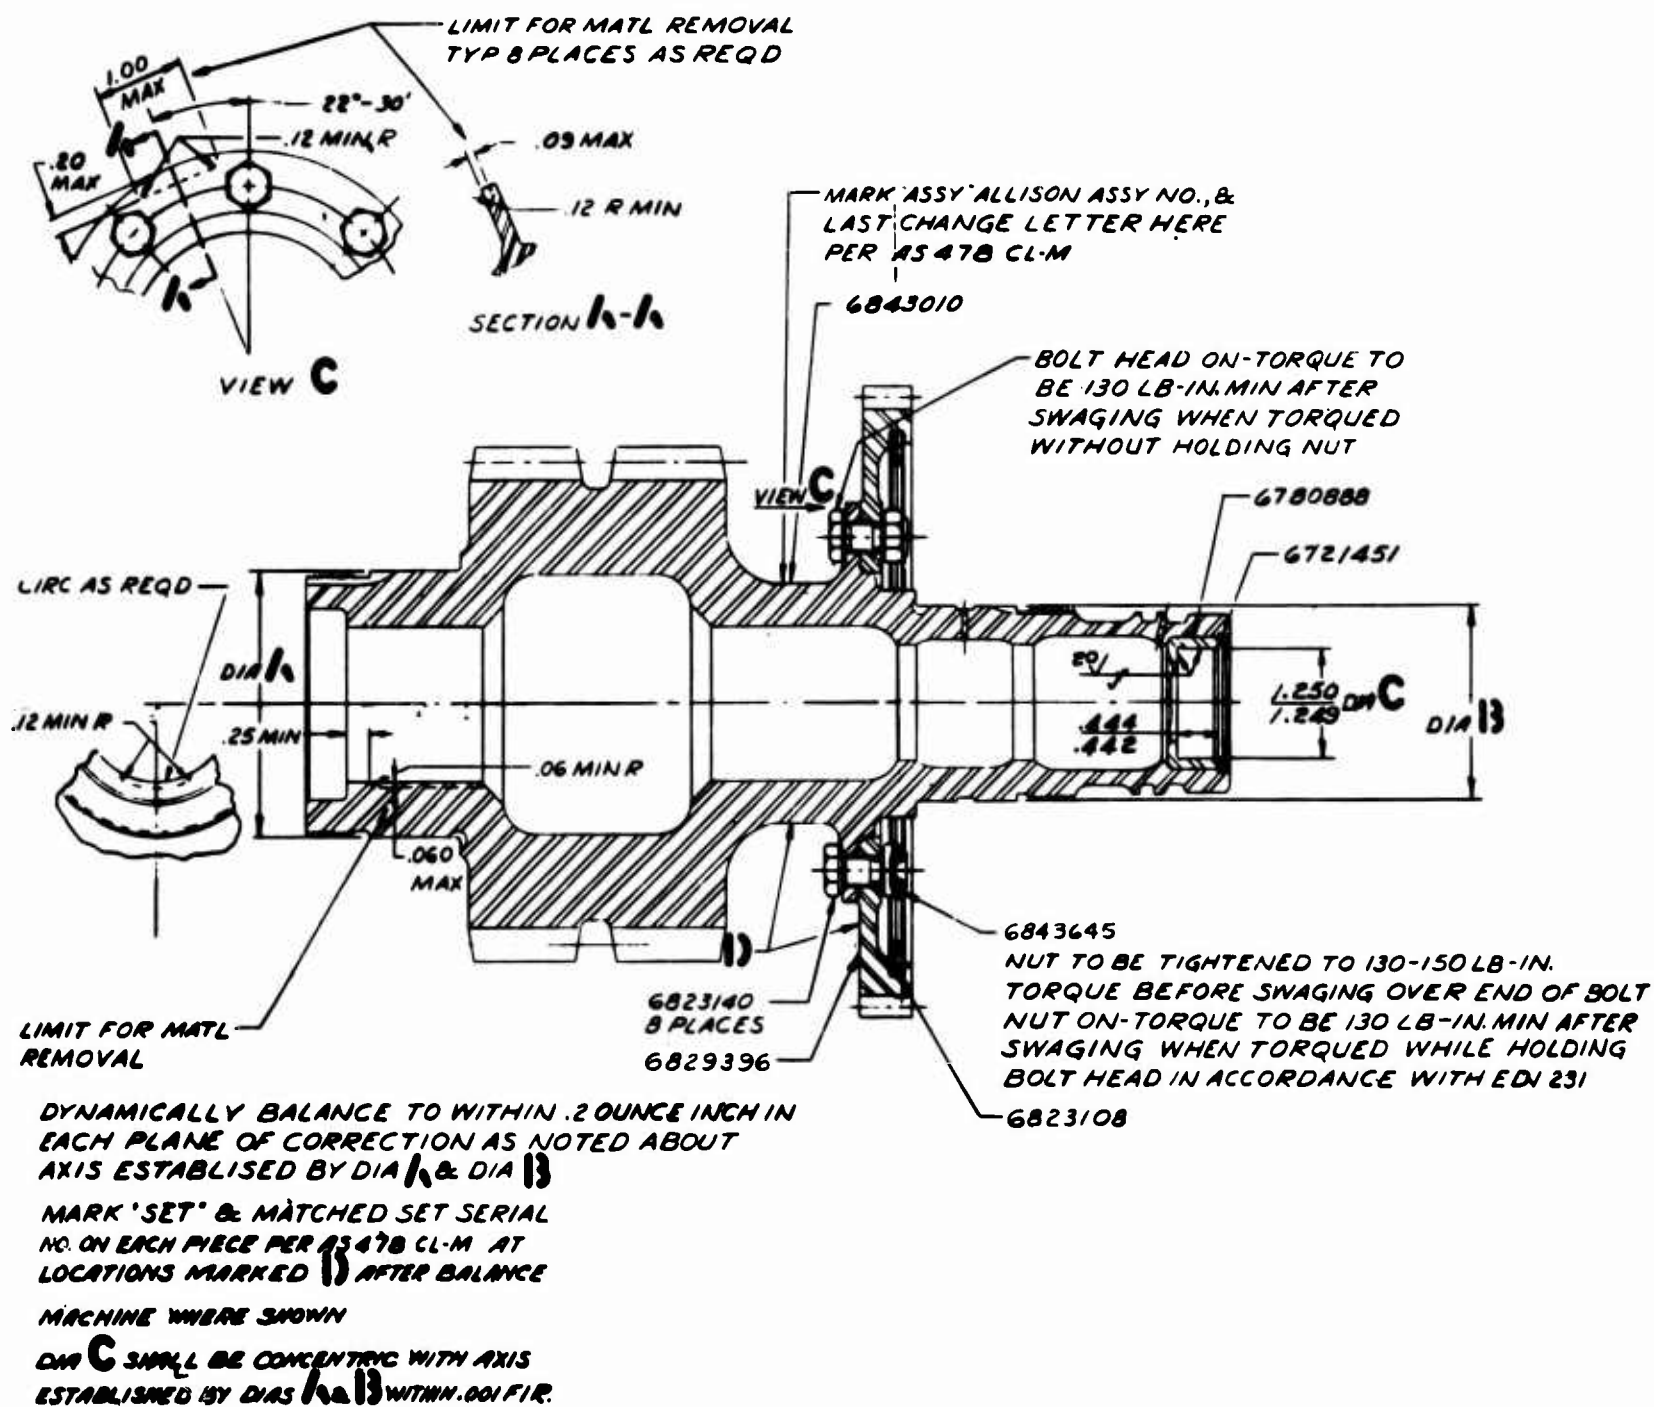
Pinion and Accessory Drive Shaftgear Assembly.
